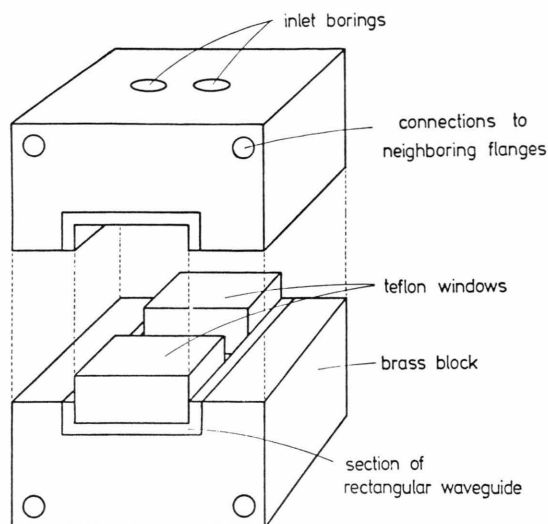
Exploded view of rectangular-waveguide sample assembly.
